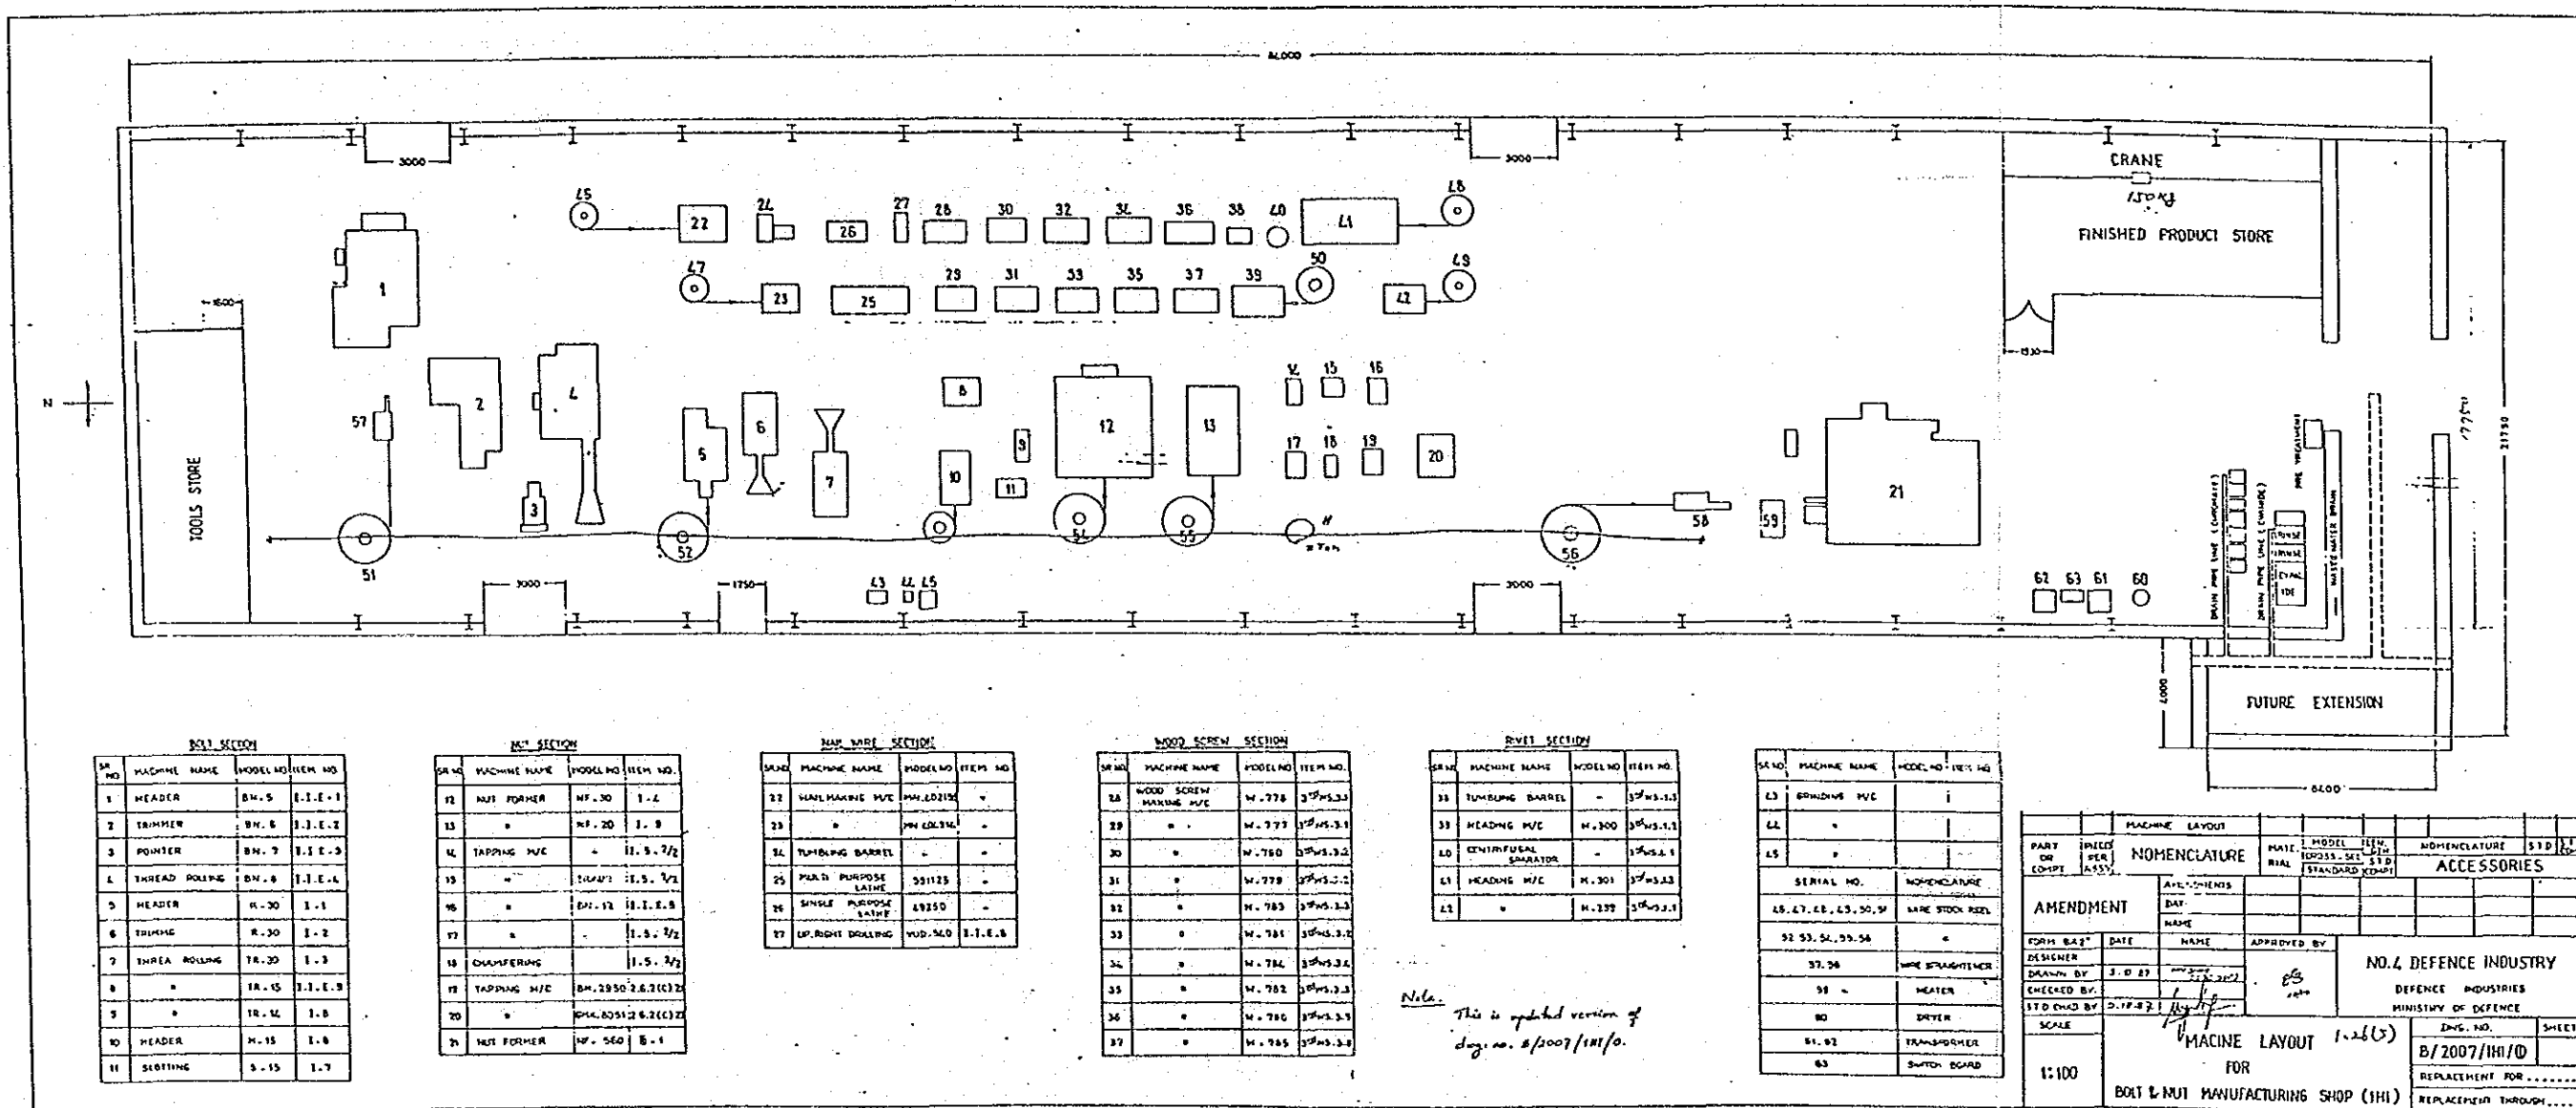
LAYOUT OF BOLT & NUT MANUFACTURING SHOP
